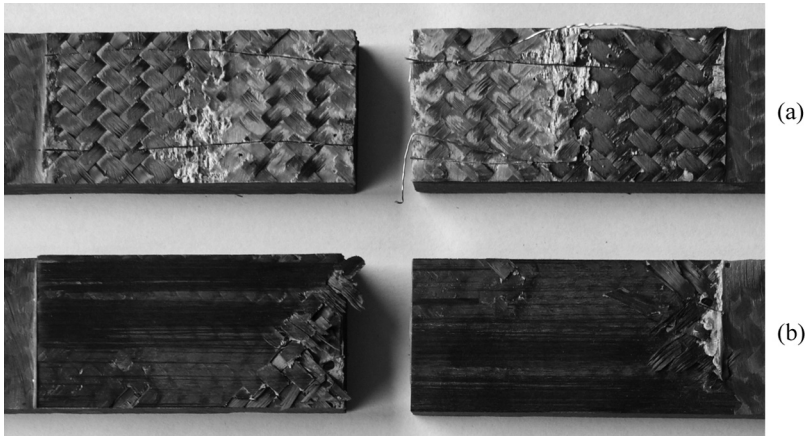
Fracture surfaces of LS 50.8 joints: (a) failure in the adhesive layer, (b) interlaminar failure.
